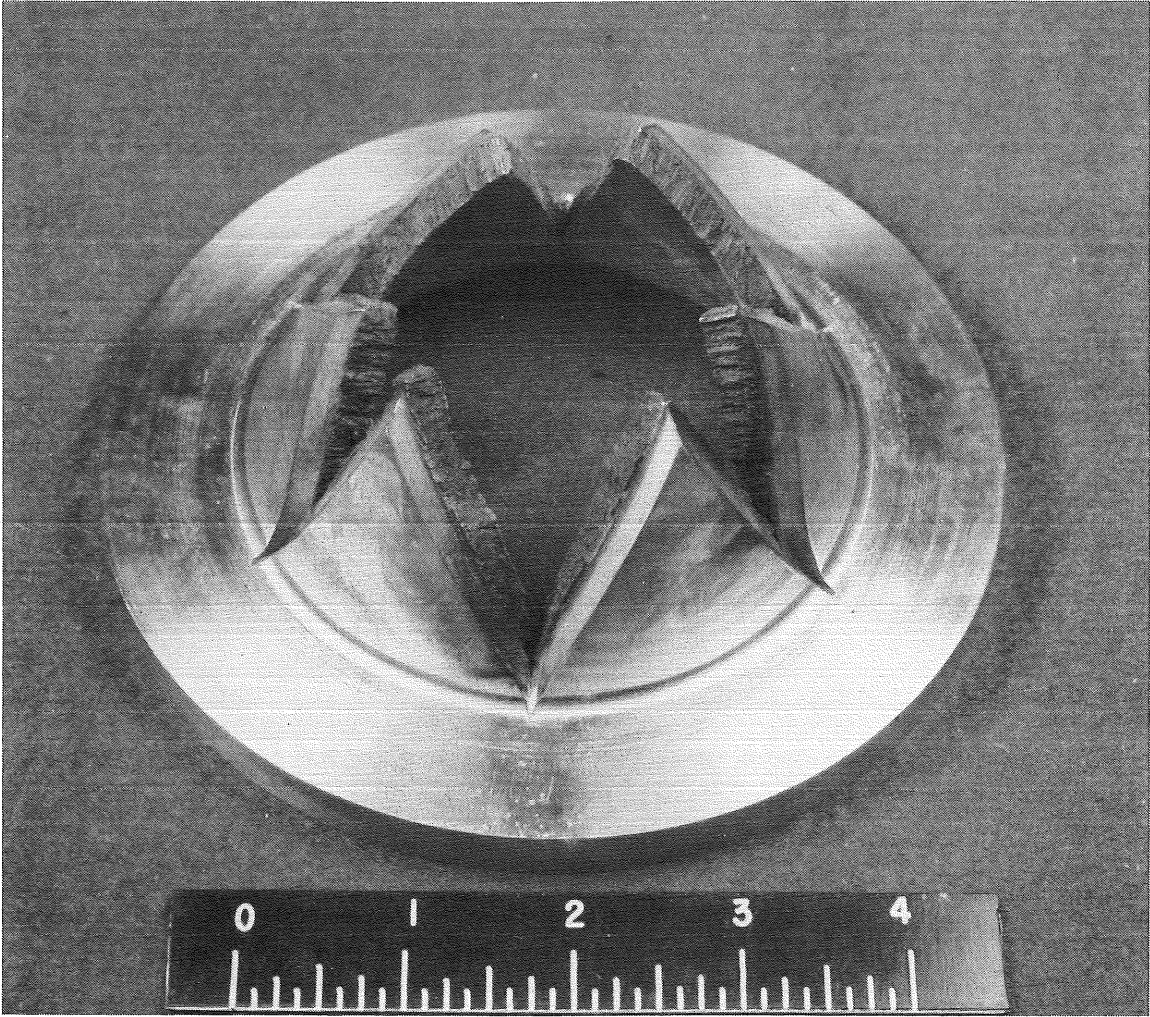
Posttest photo of flat diaphragm, Test No. 6, 1,470 bars.
